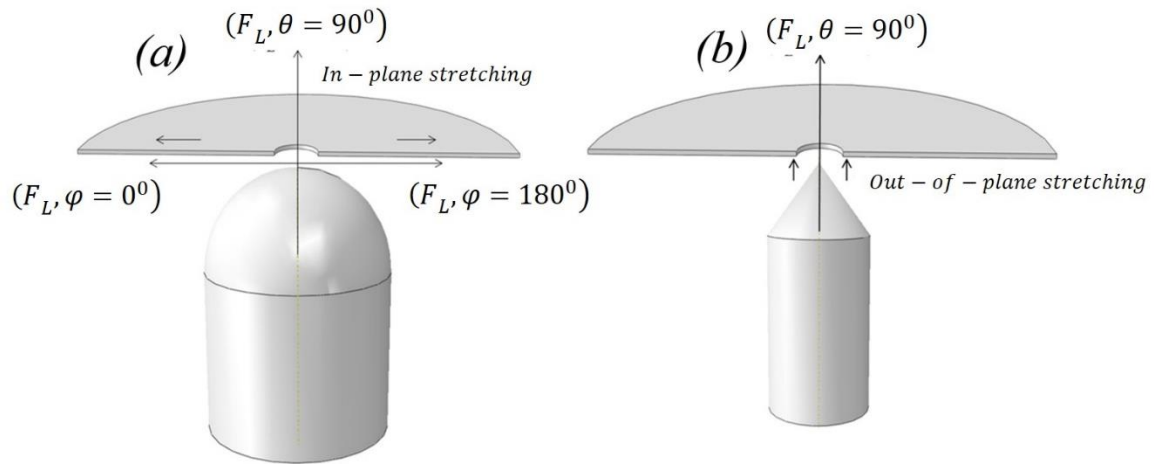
4 Schematics of tool geometry and sheet loading condition
